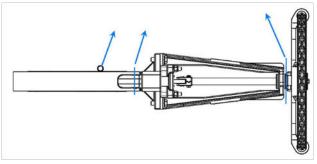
, Knife Gate Valve with Handwheel or Chainwheel Actuator, Horizontal Lifting
